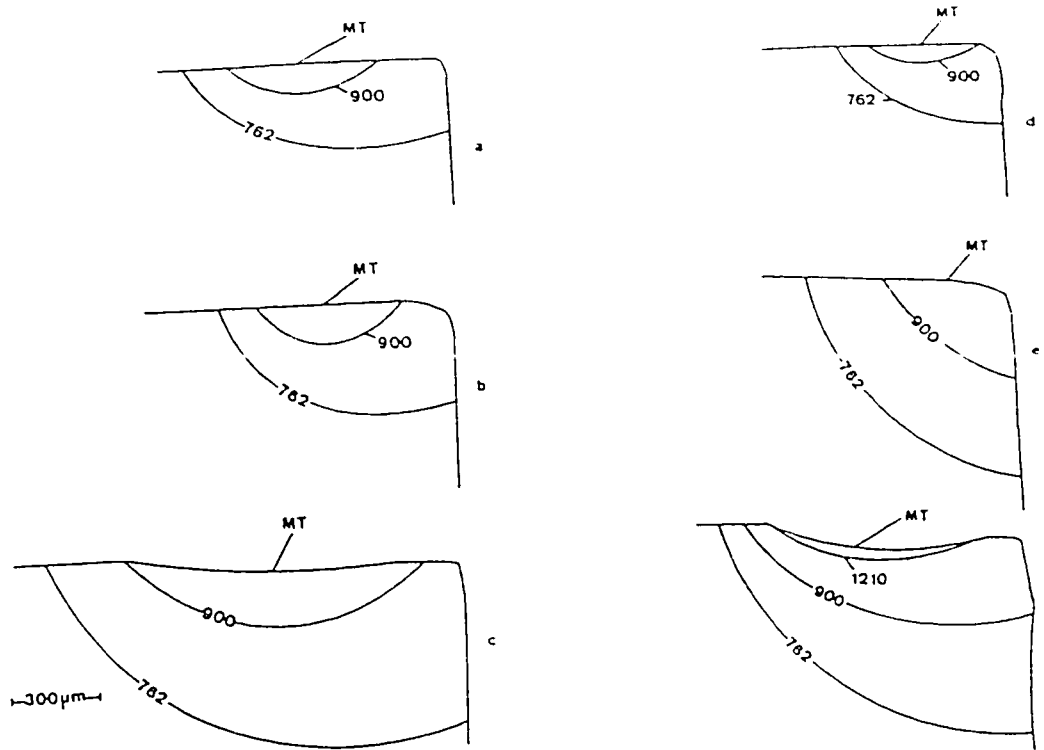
Temperature maps (in °C) derived from iron-bonded carbide tools: (a) and (b) TiN-coated carbide used to cut AISI 1042 steel at 180 and 240 m/min. Respectively for 30 s., (c) uncoated carbide used to cut AISI 1042 steel at 240 m/min. for 30 s., (d) and (e) TiN-coated carbide used to cut AISI 4340 steel at 180 and 240 m/min. Respectively for 10 s., (f) uncoated carbide used to cut AISI 4340 steel at 240 m/min. for 10 s. (After Dearnley [147].
